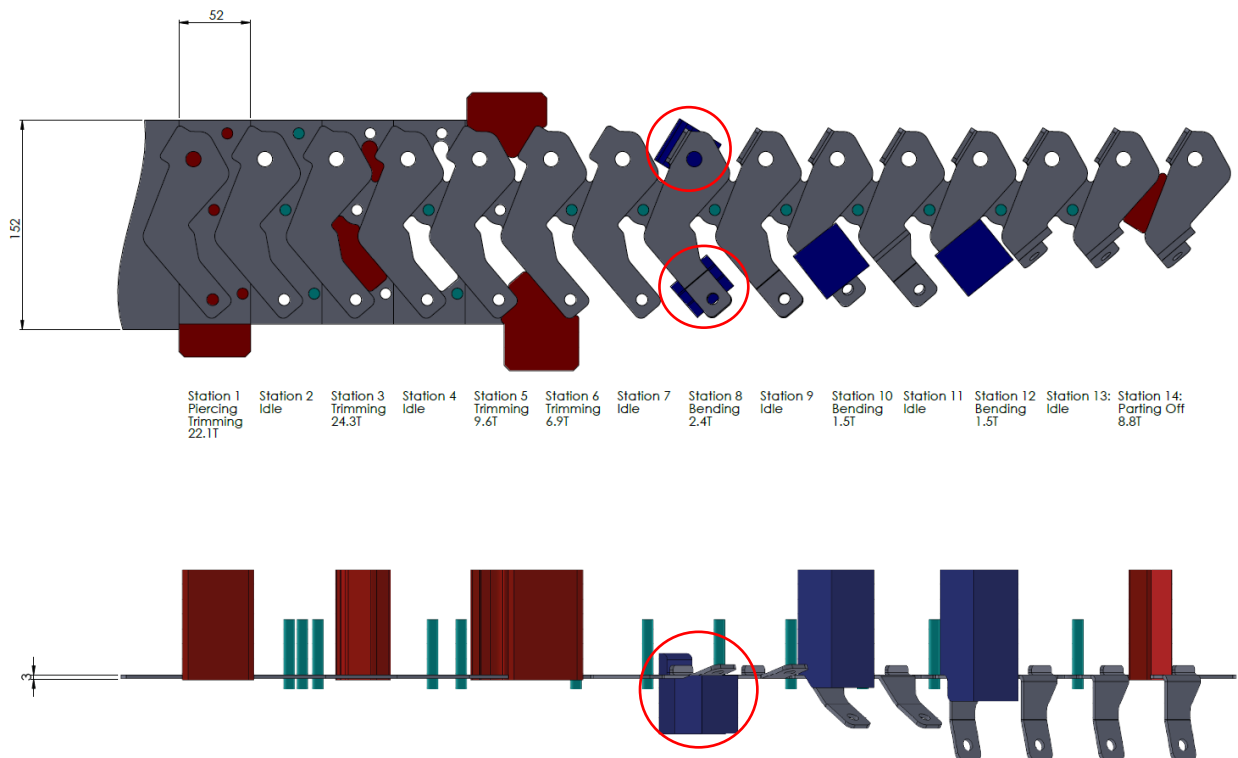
Part flanges that are formed with stripper pad, marked with red circles
